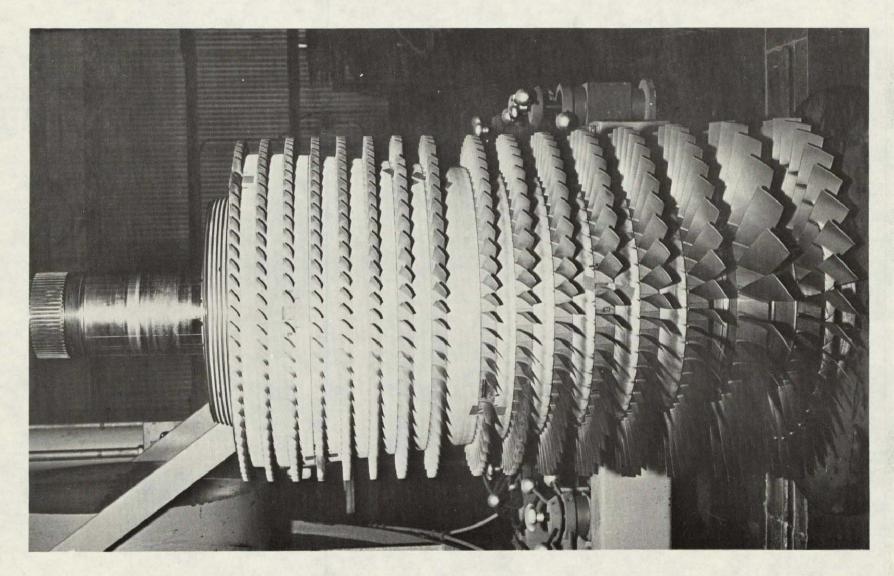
High Pressure Compressor Rotor (Cleaned), Missing Blades at Surface Finish Check.
